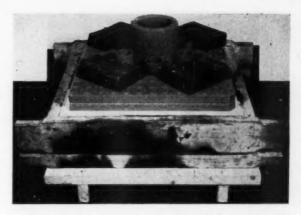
Cylinder test casting mold ready for pouring showing gate runner system.
